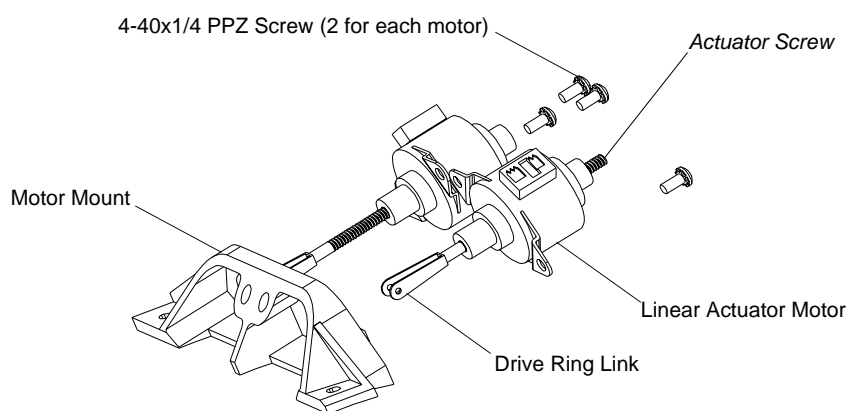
Amber/Diffuser (or Dimmer) Bulkhead - Linear Actuator Motors
